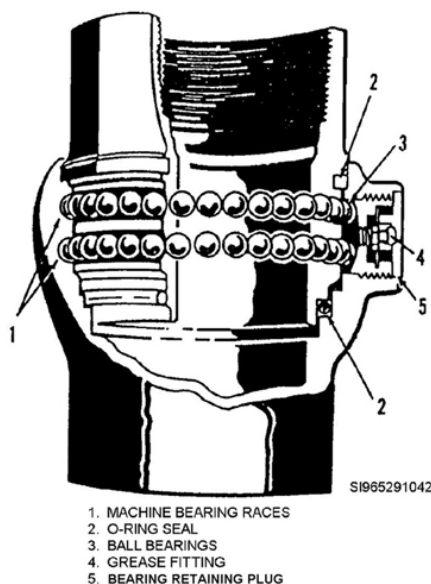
OPW swivel joint. (Courtesy of OPW, A Dover Company.)
